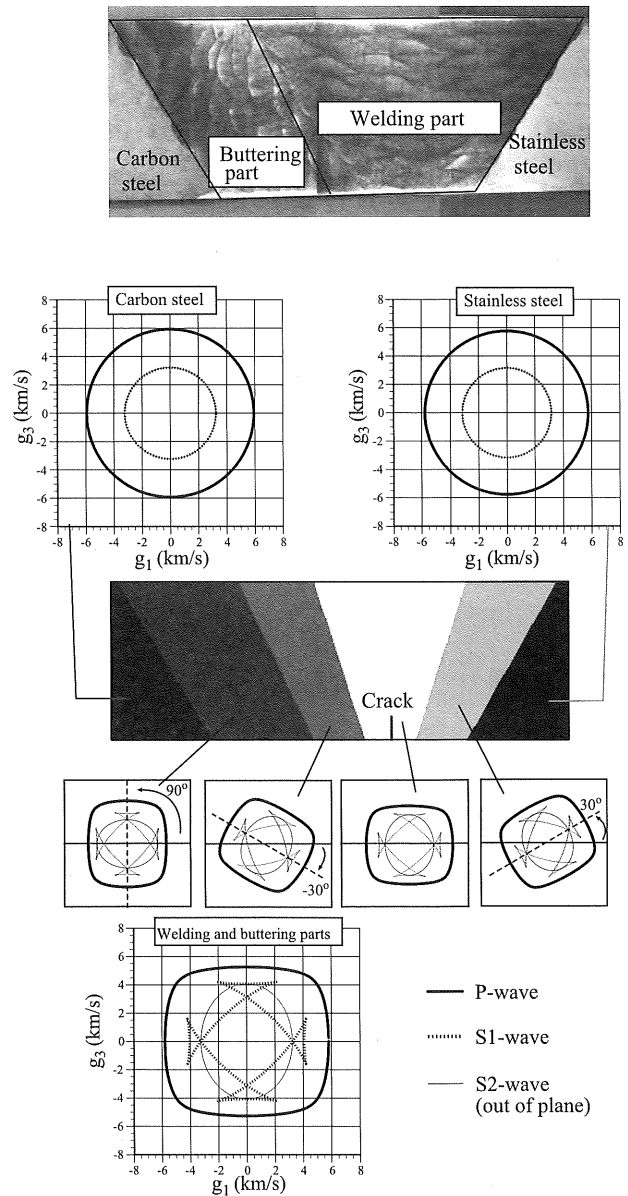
Model of dissimilar metal welding part which shows local anisotropy and heterogeneity
